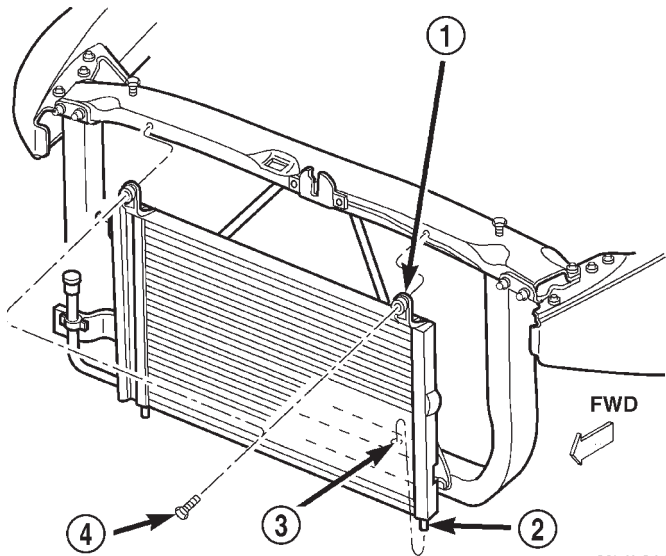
CONDENSER REMOVE/INSTALL - GASOLINE ENGINE
